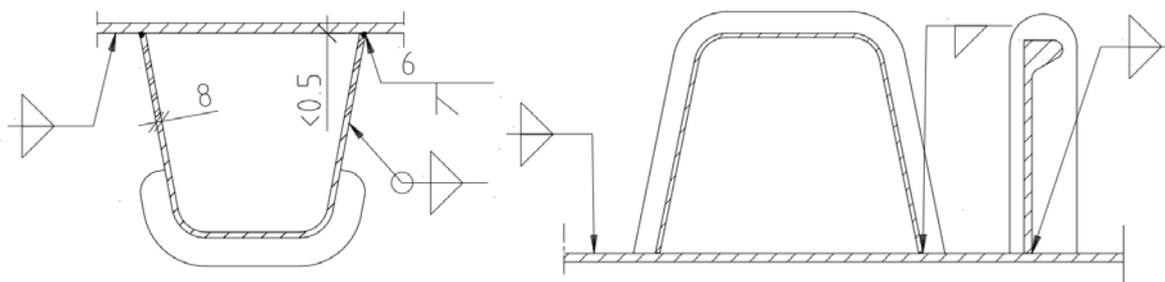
Welds between stiffeners, skin plate and T-beam
